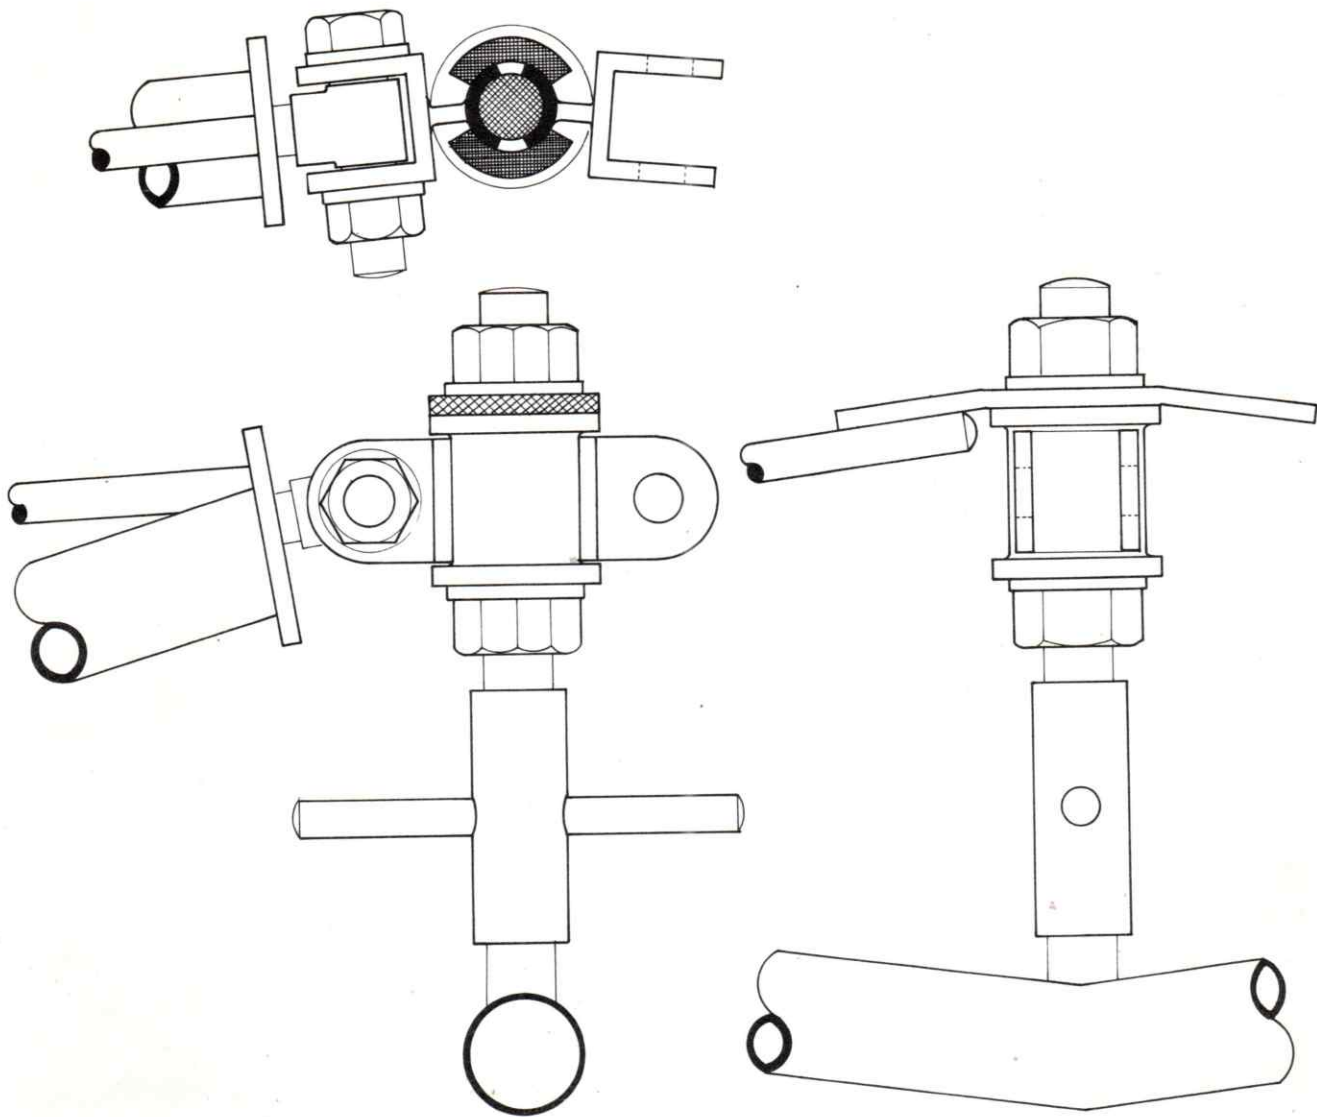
Typical universal pivot joint used throughout test Fig. 64.
